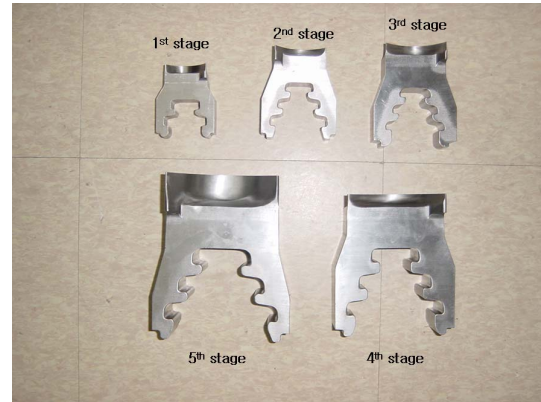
Low pressure steam turbine blades (1 ~ 5 stage) UT specimen.
